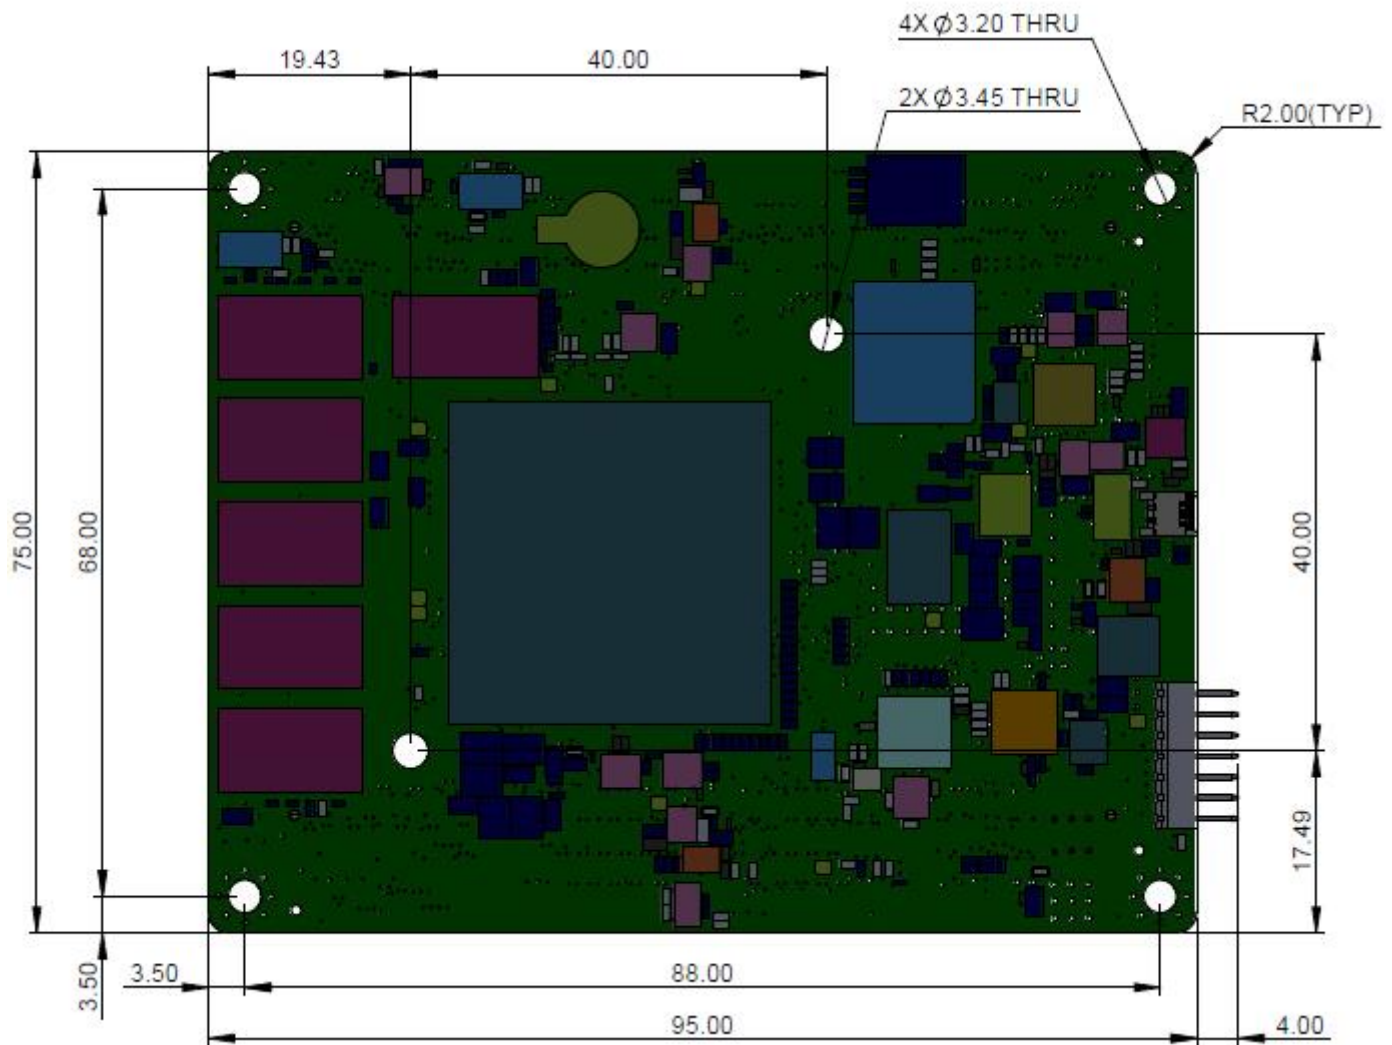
Mechanical dimension of Zynq Ultrascale+ MPSoC SOM - Top View
